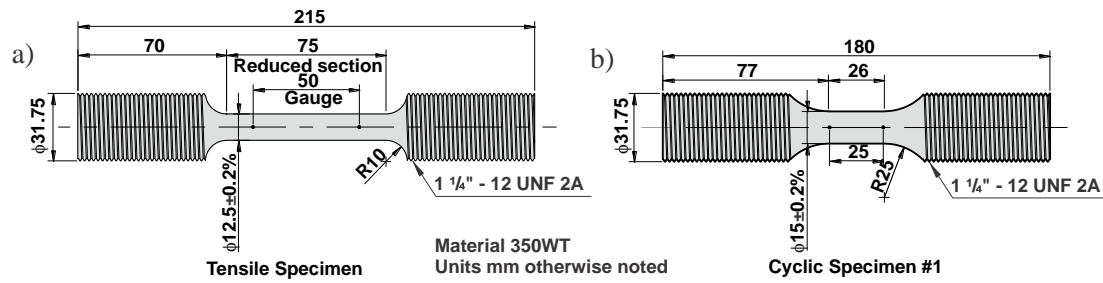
Geometry of specimens: a) Tension; b) Cyclic.
